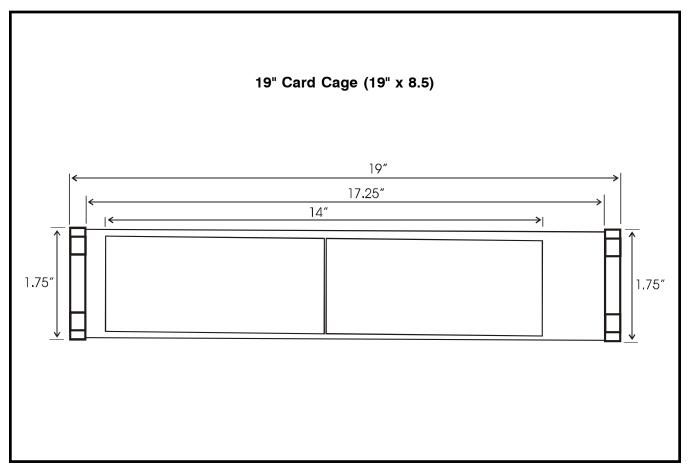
TCRM195 " Pizza Box" Rack Mount Card Cage
